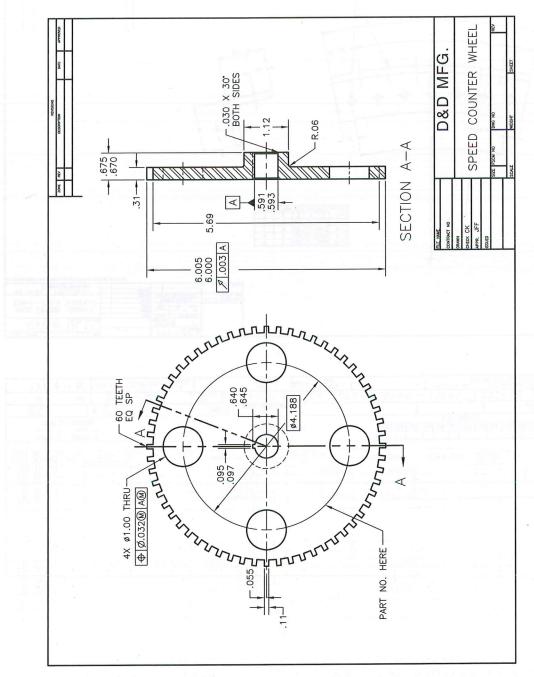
A detail drawing provides complete information necessary to fabricate, finish, and inspect the part.
